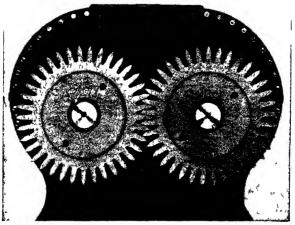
Gib key allows gear adjustment to maintain impeller clearance.
